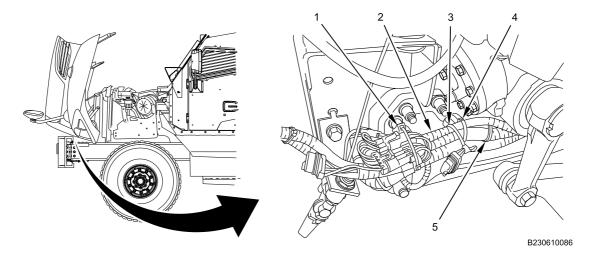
Front Bumper Left Harness Cable Lock Straps.
